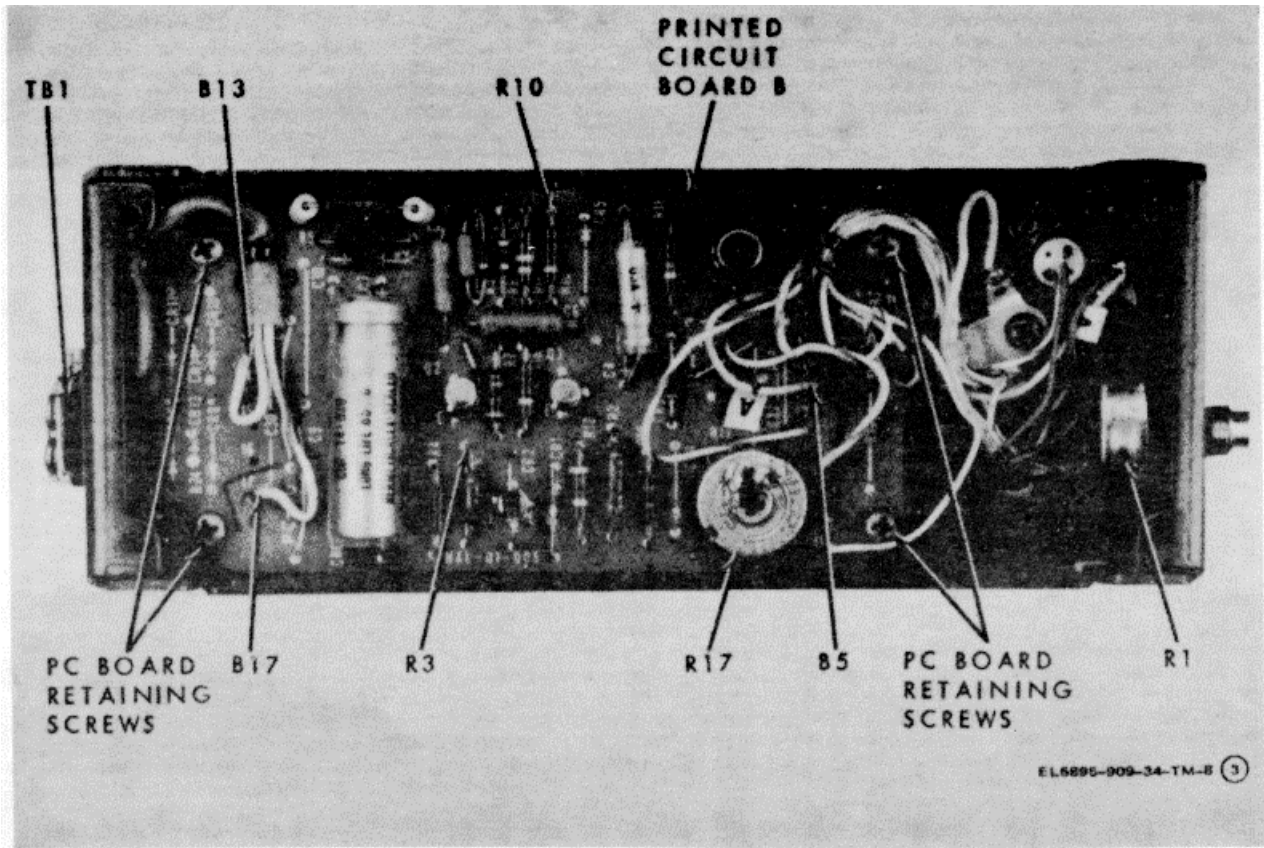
5 V dc power supply HTA-3A6PS3, parts location (sheet 3 of 6).
